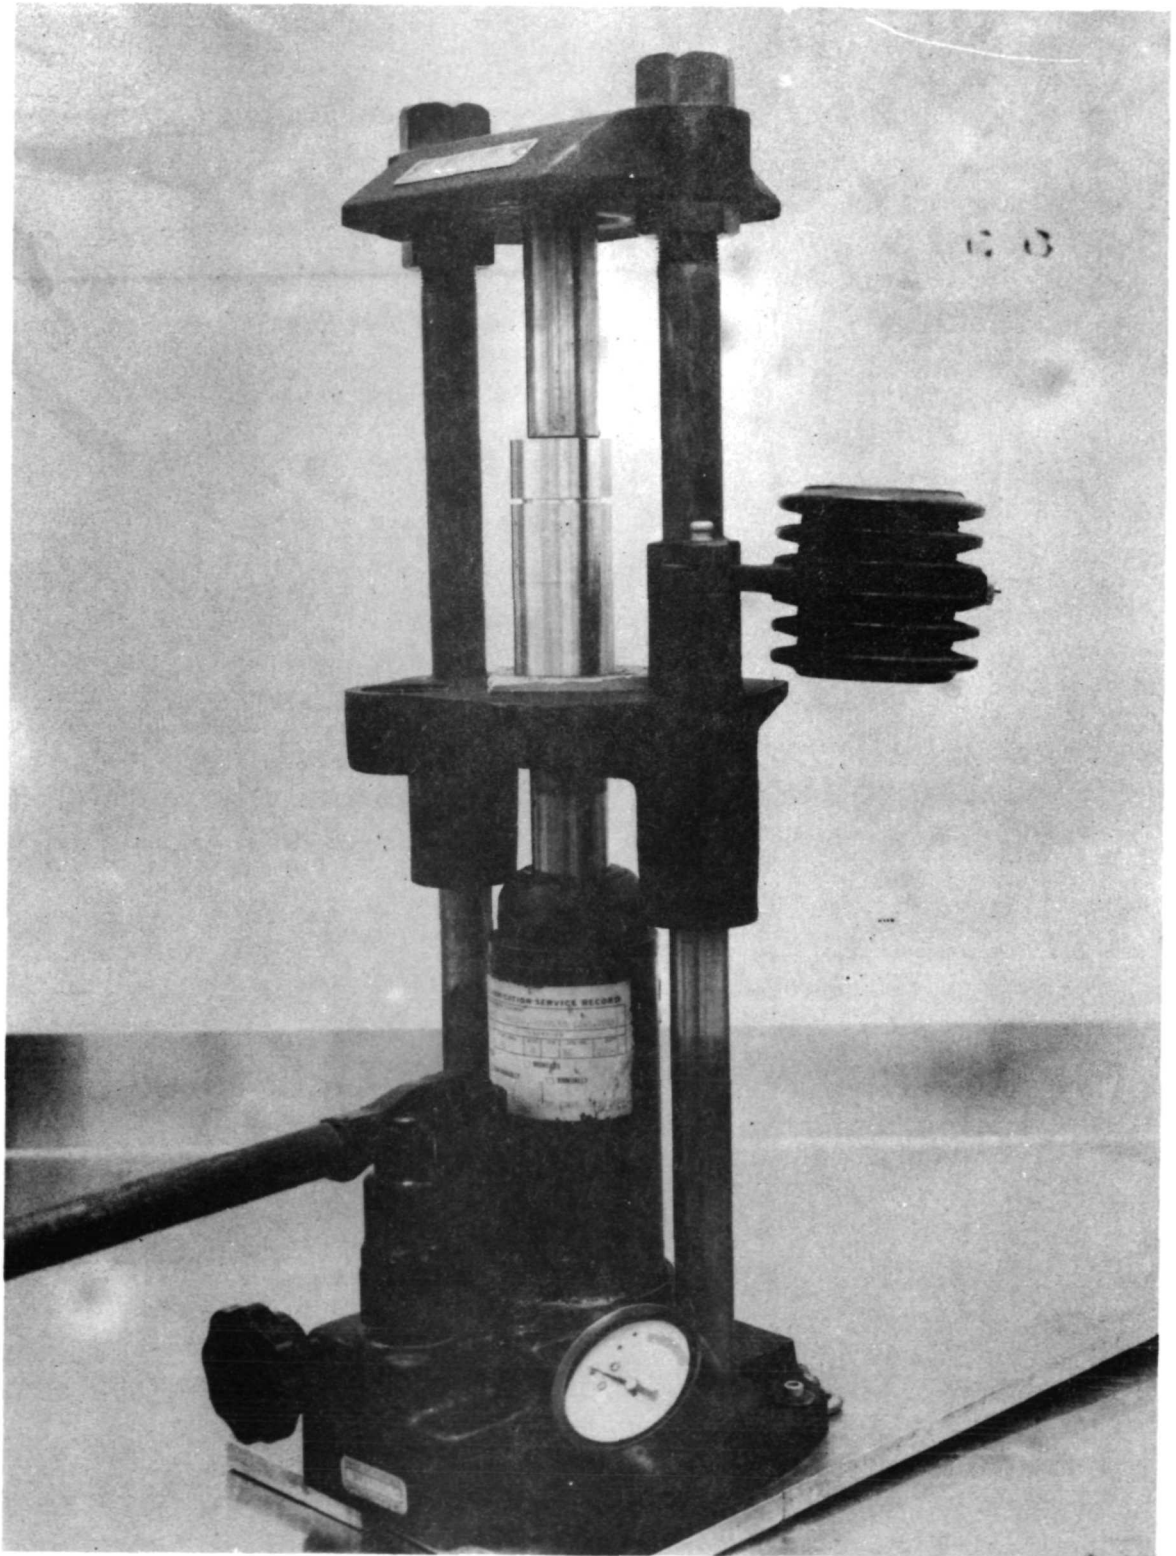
Tooling for coins in press (used for manufacture of coins and for bonding of stack).
